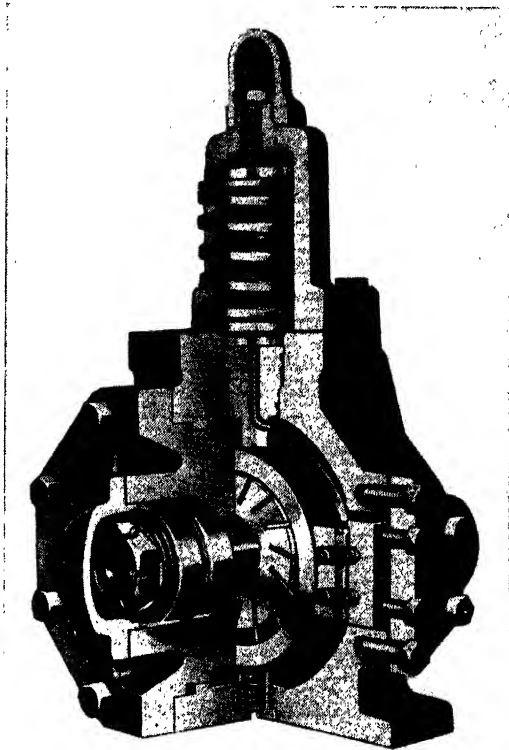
Variable-stroke vane pump. The stroke setting is automatically adjusted to maintain a constant output pressure. (*Courtesy of Racine Tool and Machine Company.*)
